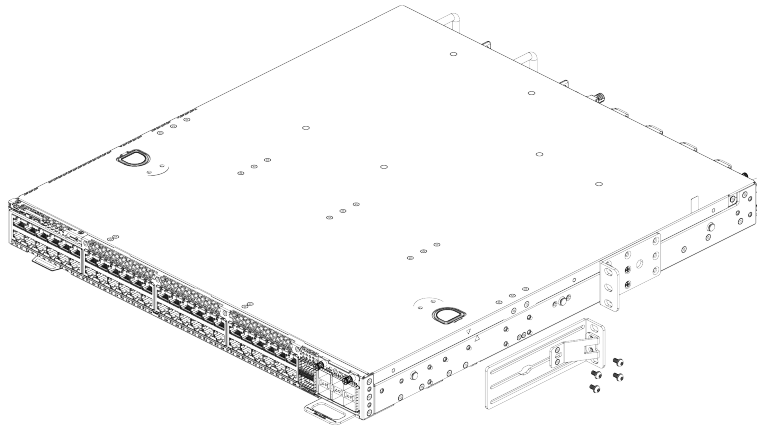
Attaching a Long Mounting Bracket: Middle of Switch
